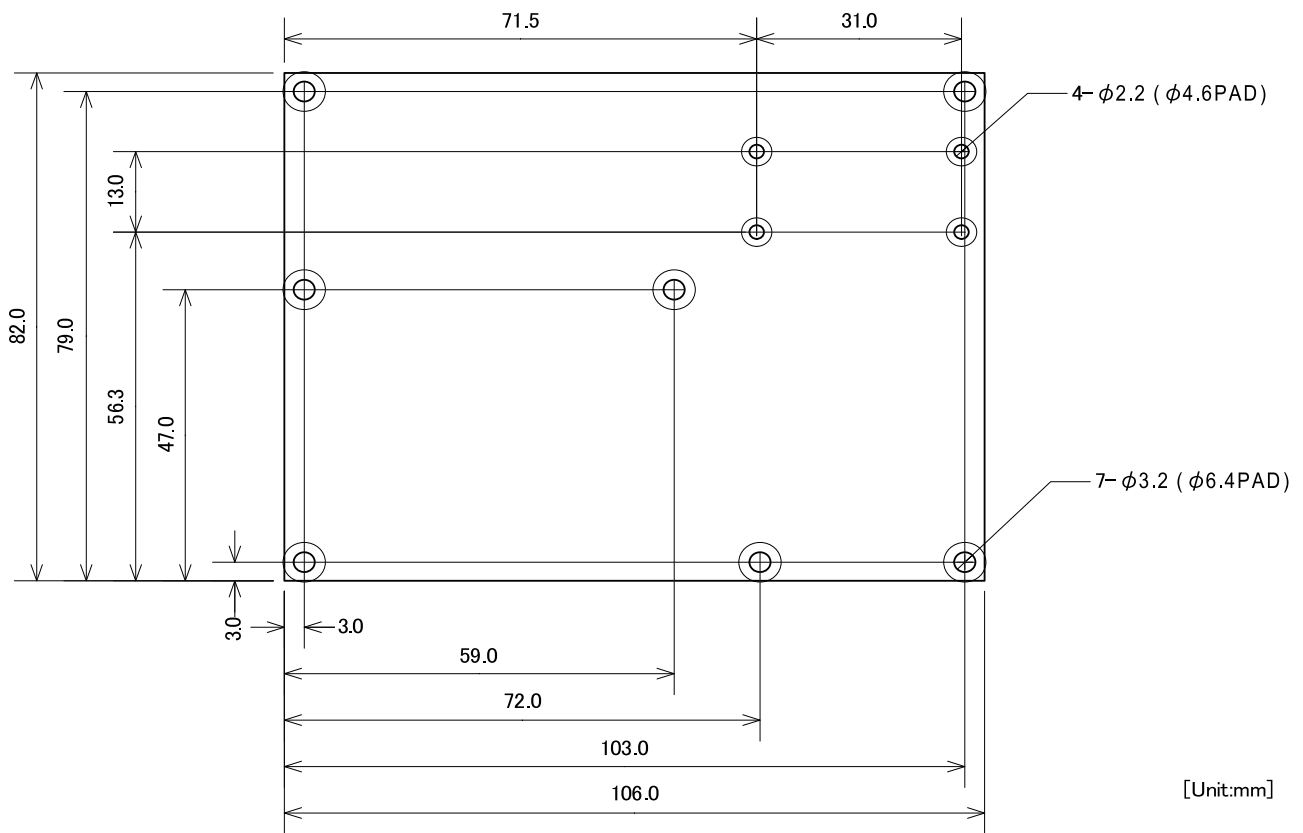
LCD Expansion Board (Product Revision A) Dimensions and Fixing Hole Measurements
